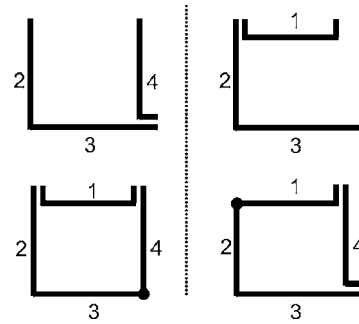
Assembly sequences (a) without and (b) with proper constraints (see Ref. [1])
